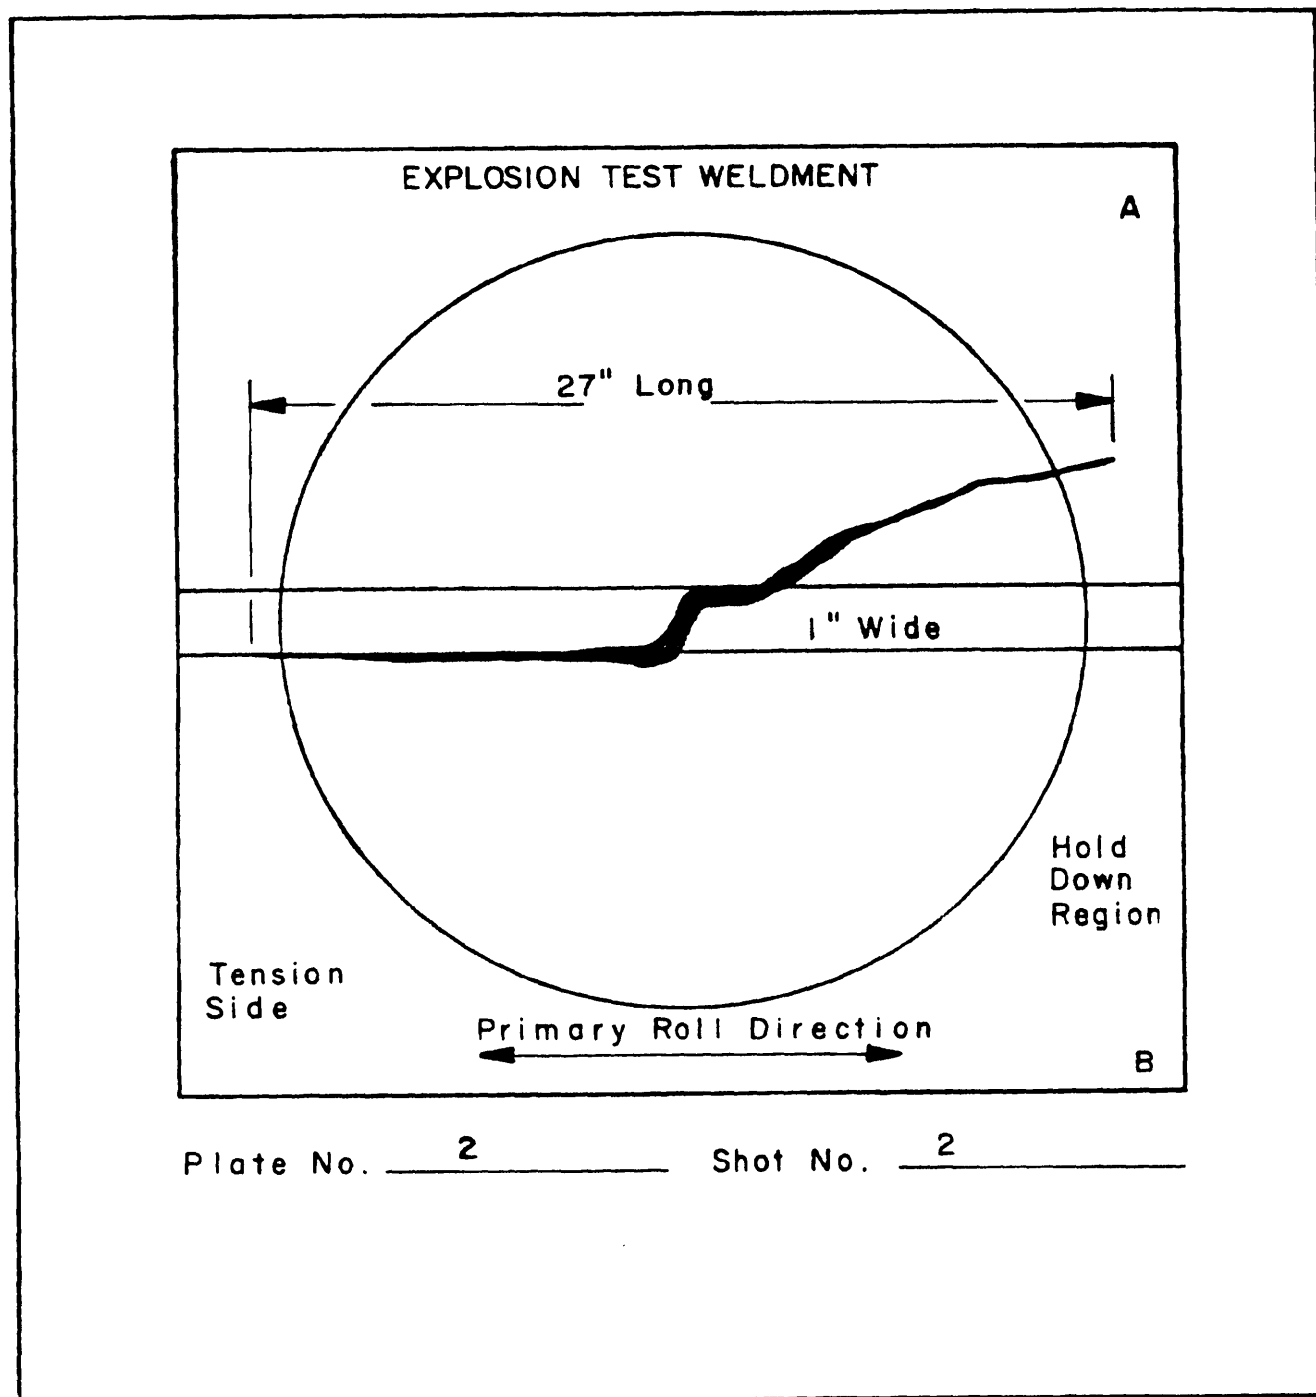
Typical fracture sketch of explosion test weldment.
